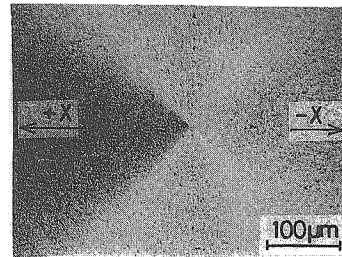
Photograph of diamond-turned surface of LiNbO<sub>3</sub> workpiece
